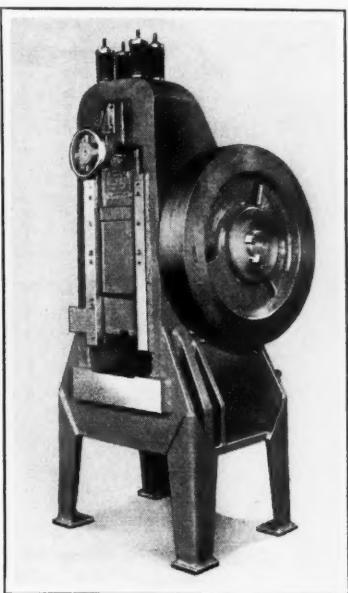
Henry & Wright Welded All-steel Knuckle-joint Press of 200 Tons Capacity
